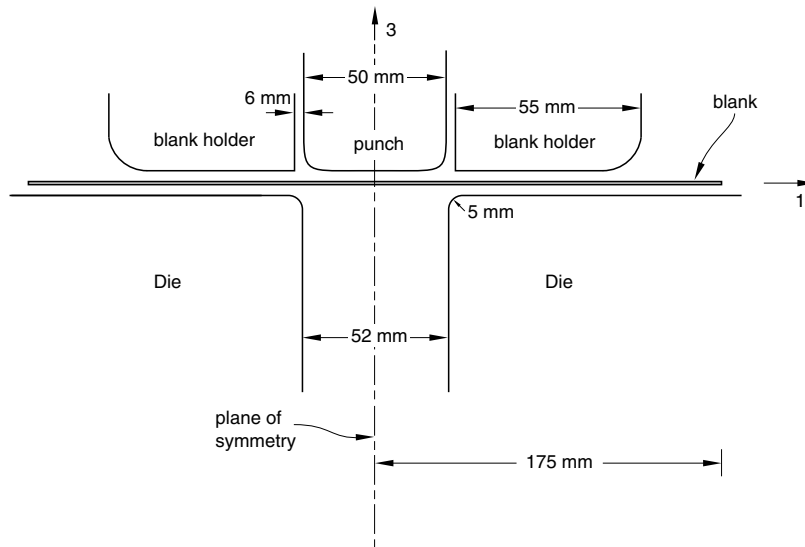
Cross-section showing the geometry of the die, the punch, the blank holder, and the blank.
